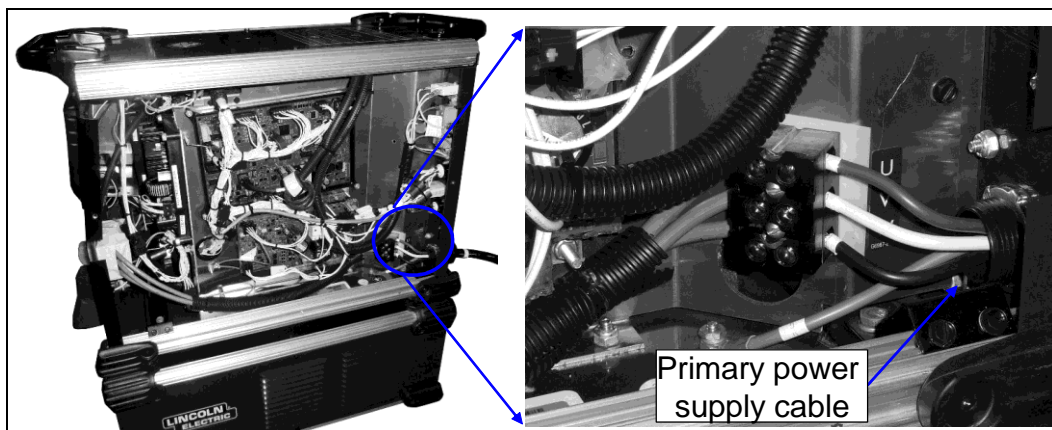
(b) Connection of welding power supply Power Wave R350, Power Wave S350
